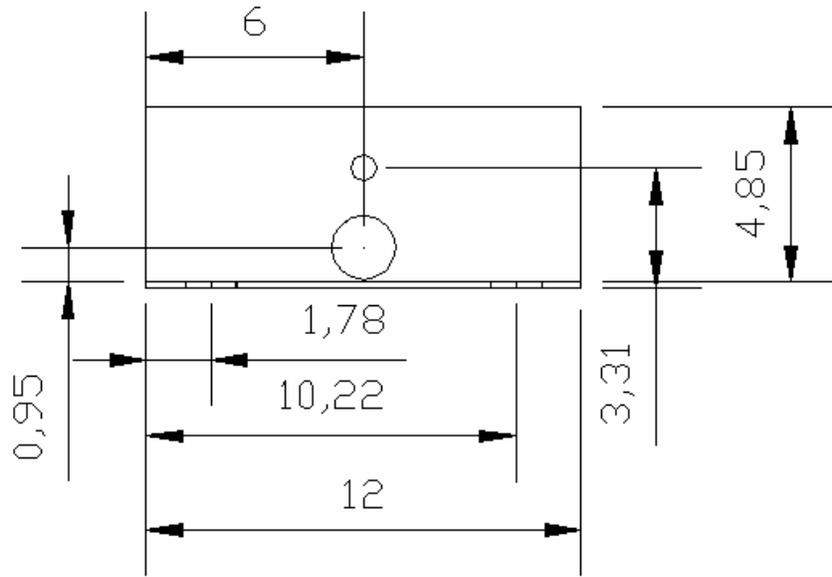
Cam sensor mounting bracket, front dimensions, dimensions in cm.
